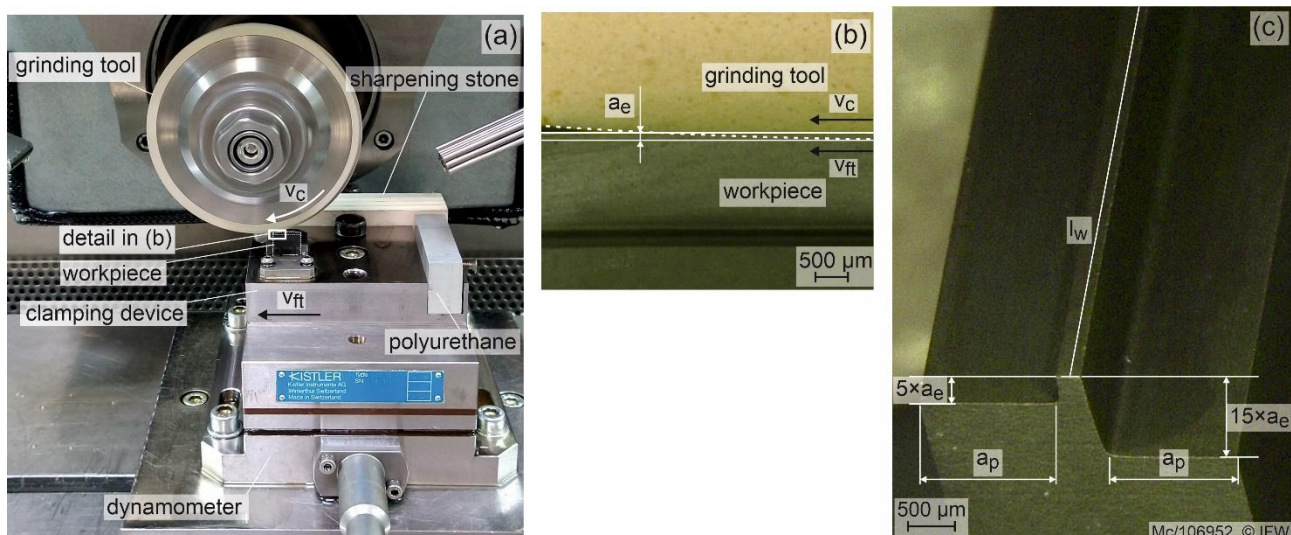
Experimental setup a) overview, b) contact zone, and c) ground workpiece.
